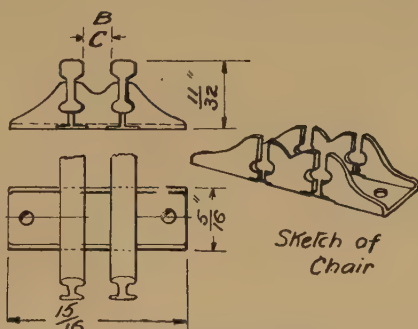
“ Millbro ” Spring-Steel Check Rail and Chair
